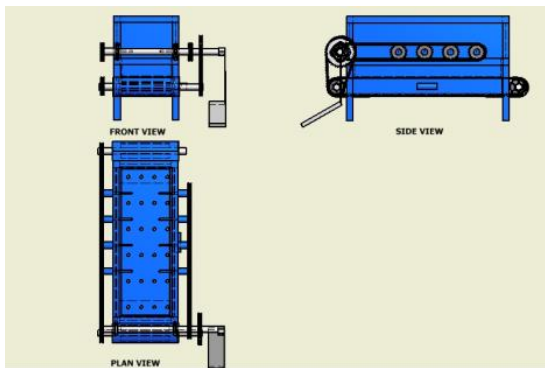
Orthographic View of the Multi-Purpose Roasting Machine.
